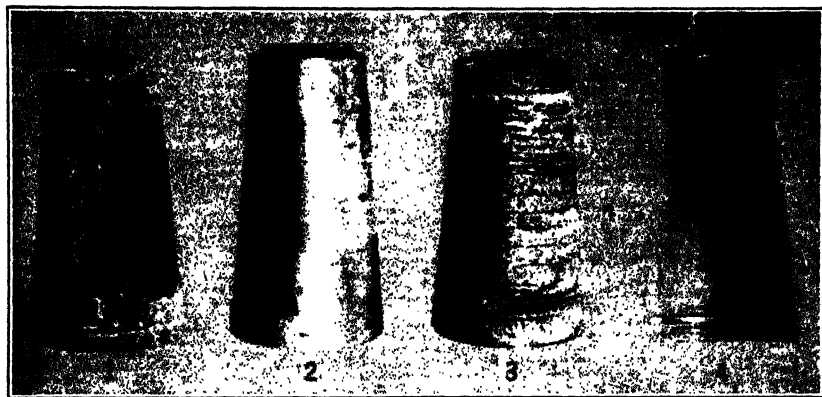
Valve Plug Coated with Corrosion-Resistant Overlay.
